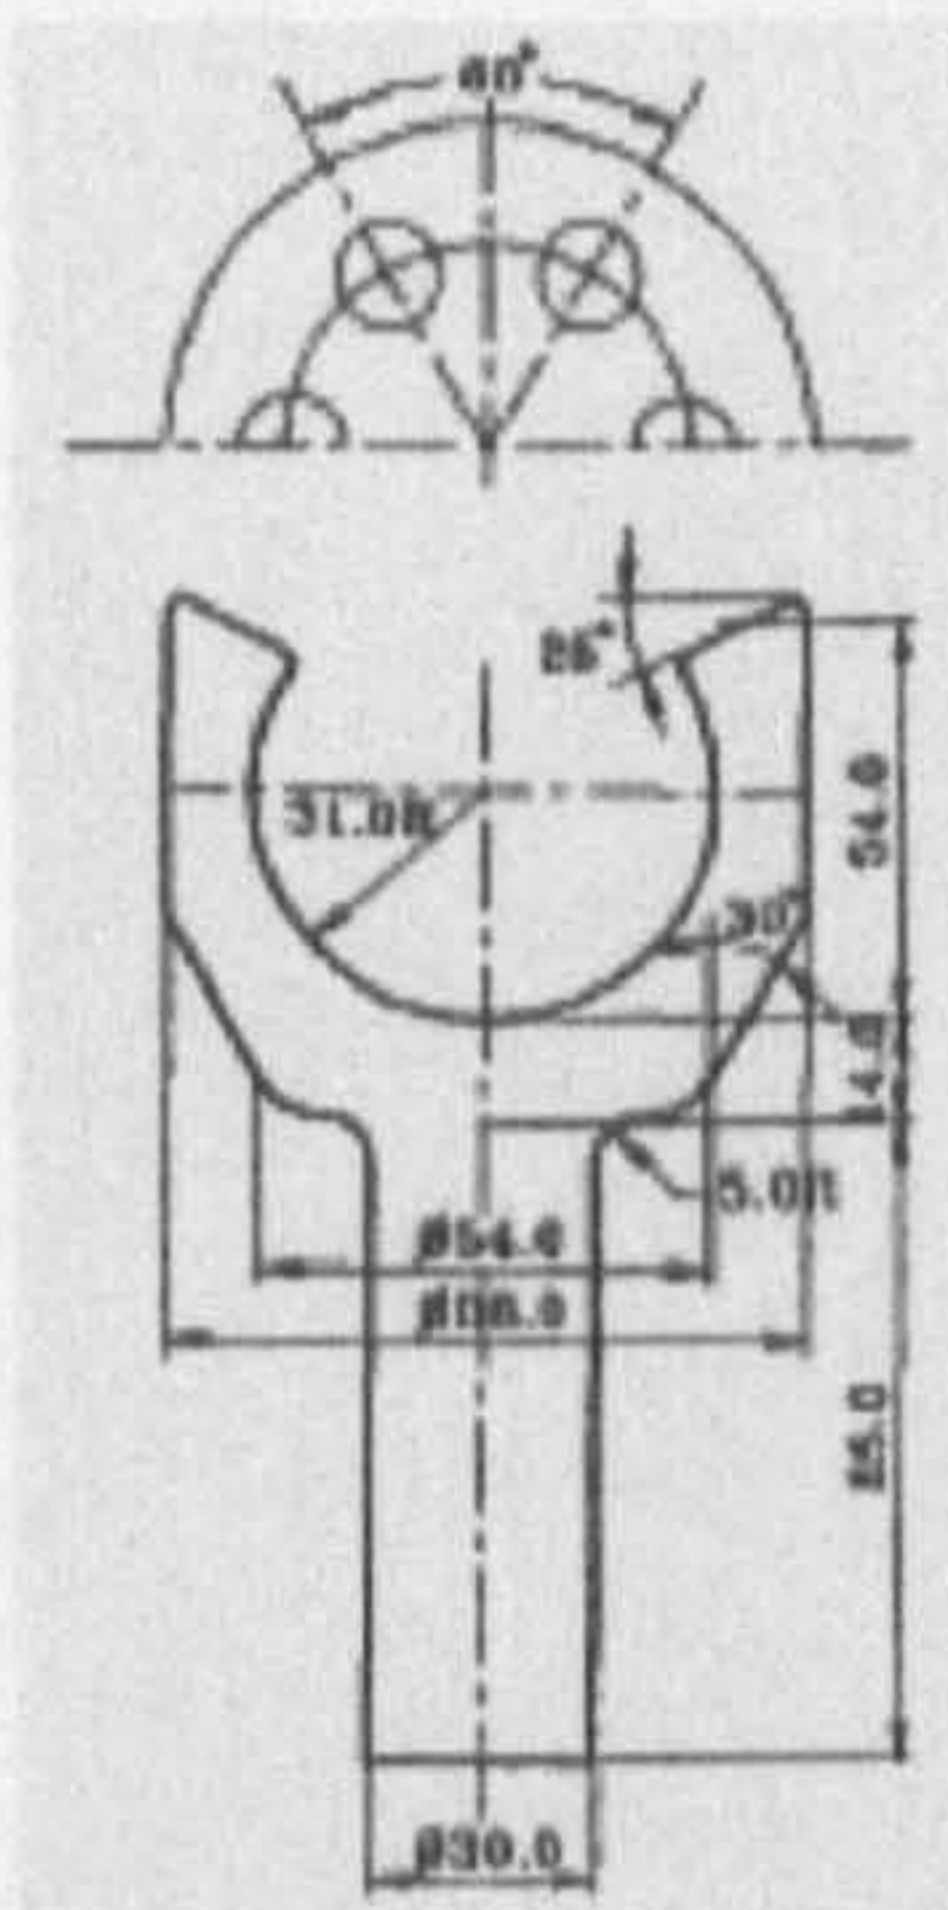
Die design schematics of cold forging spur gears [12]
